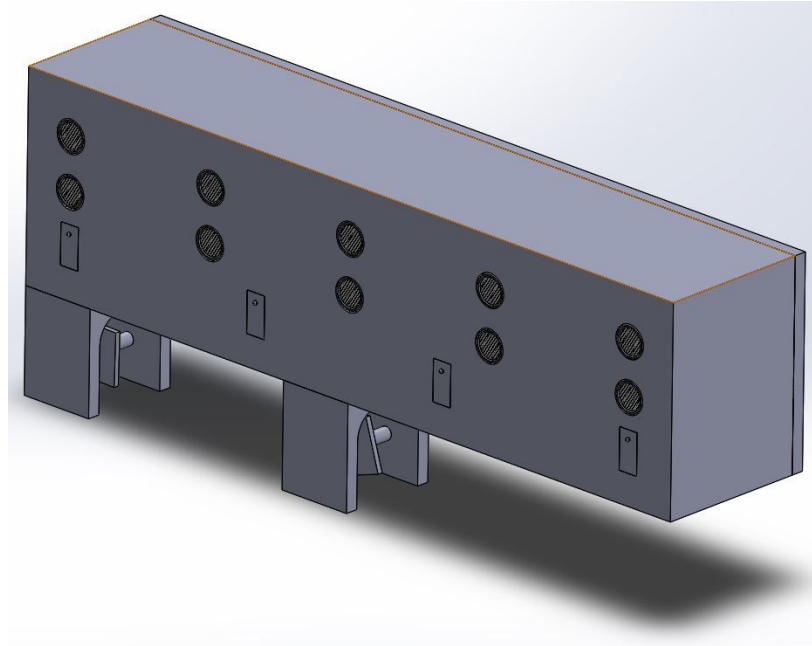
3D isometric model of the housing with full assembly including attachments and sensors.
